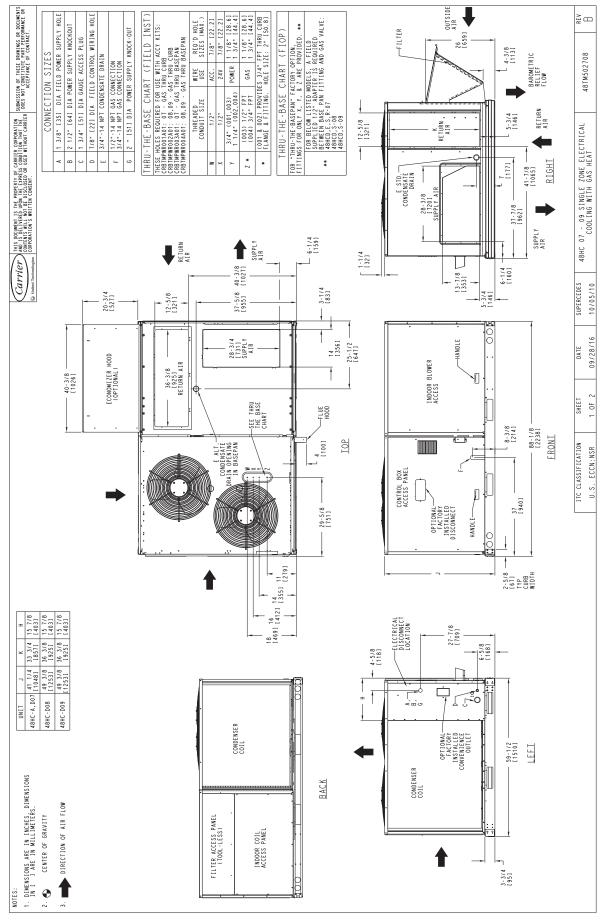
Unit Dimensional Drawing — Sizes 07-09
